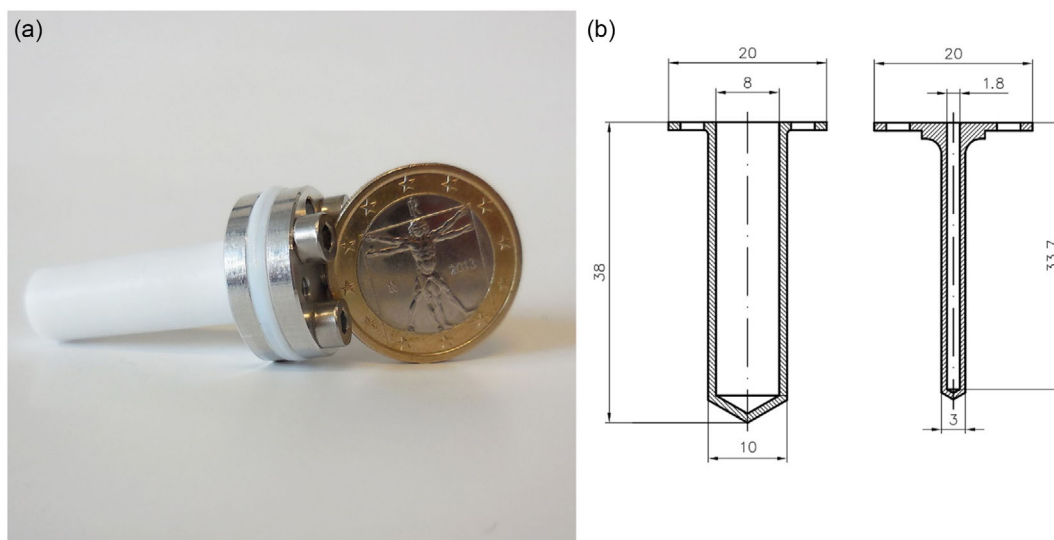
a) Picture of miniaturized Ga phase-change cell; b) technical drawing of miniaturized Ga phase-change cell, the dimensions are in millimeters.
